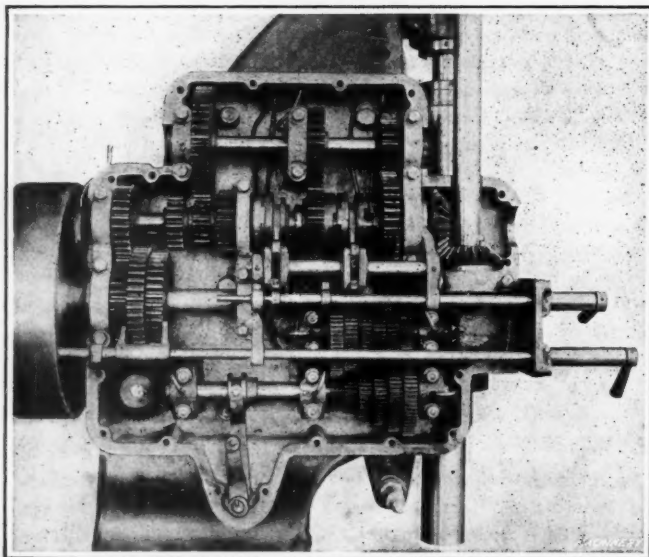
Arrangement of Gearing in Speed and Feed Box
